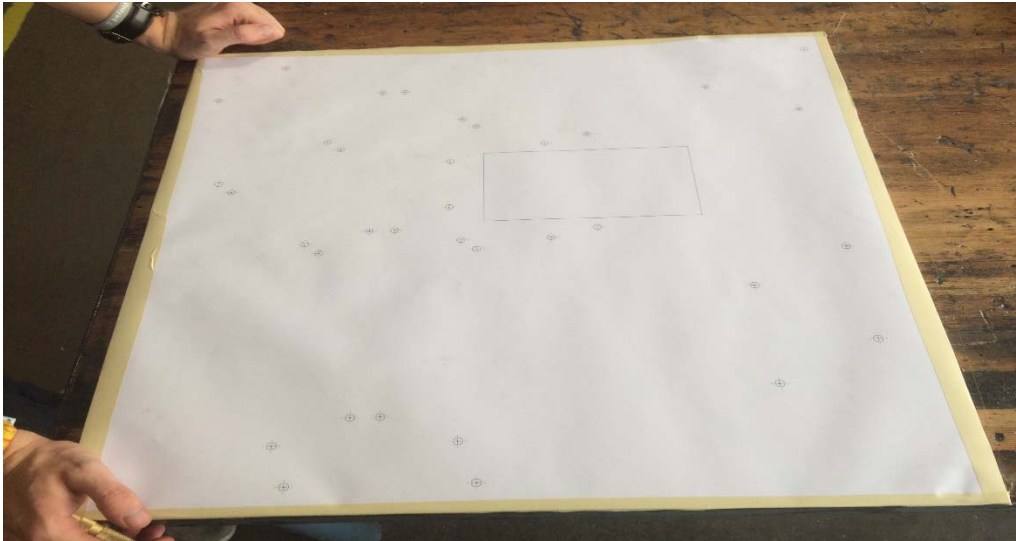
The base plate set up before using a drill press to drill and chamfer the specified holes.
